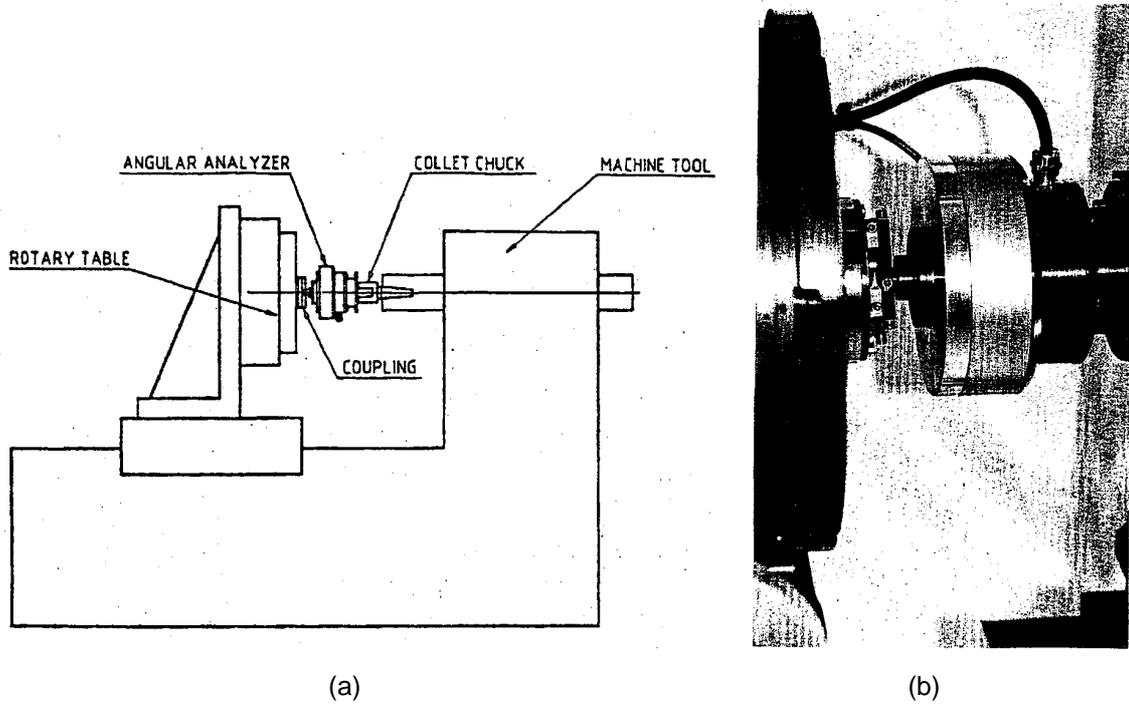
Setup for measurements of the CNC rotary table (a) and a general view of the device (b)
